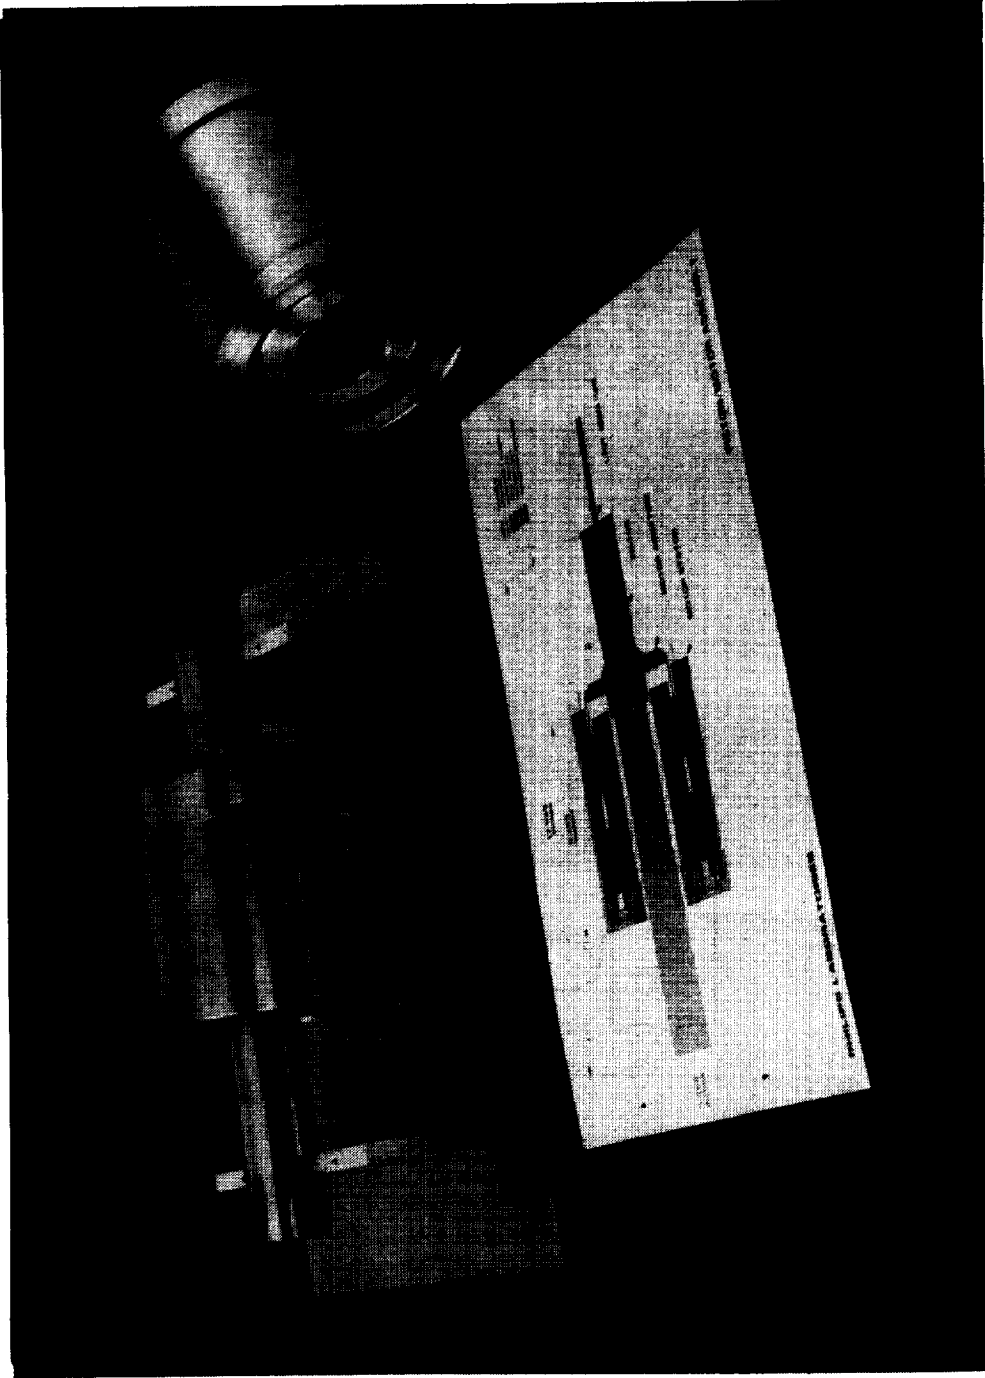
Completed piston armature on piston shaft, shown with stator assembly.
